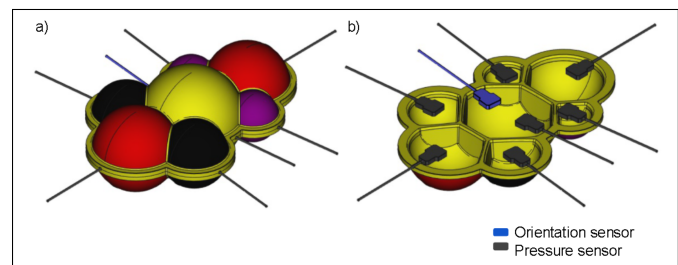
Technical drawing of a perspective (a) and sectional (b) view of the interface and sensor assembly
